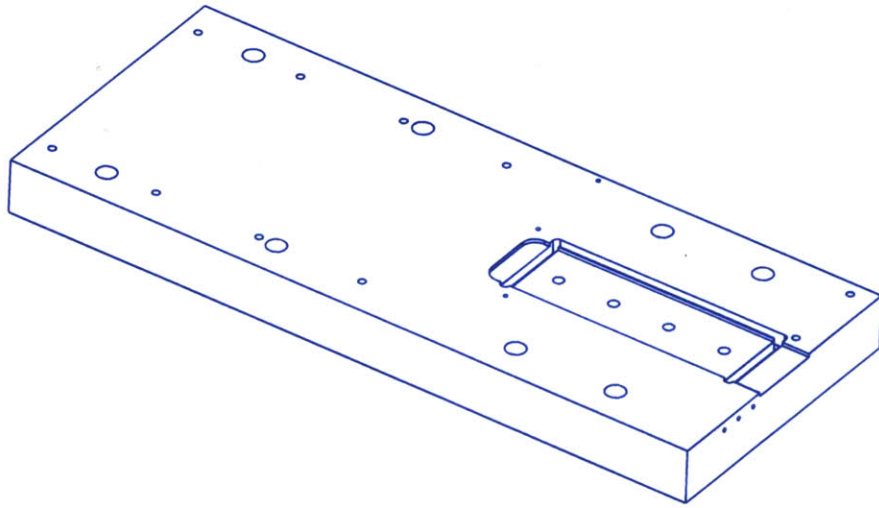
ProE model of the adapter plate used to mount the prototype FTS to the hydrostatic slide.
